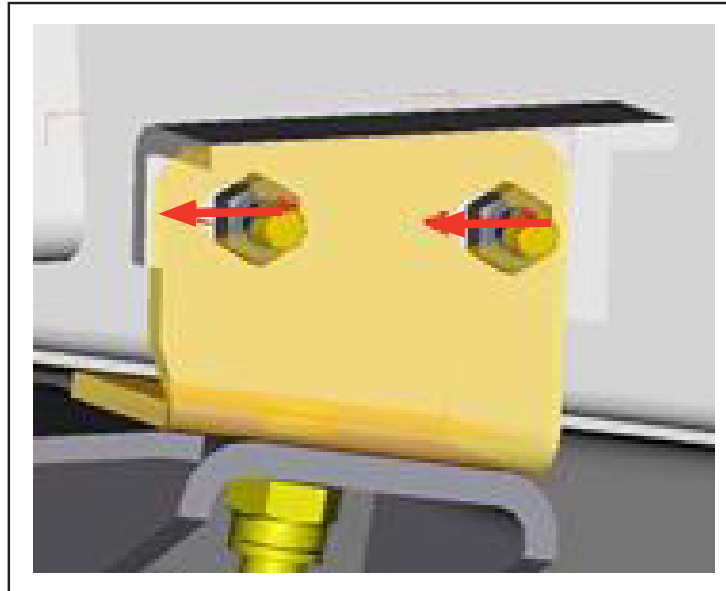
Apply Thread Locker Loctite 243 to Screw M8x25
